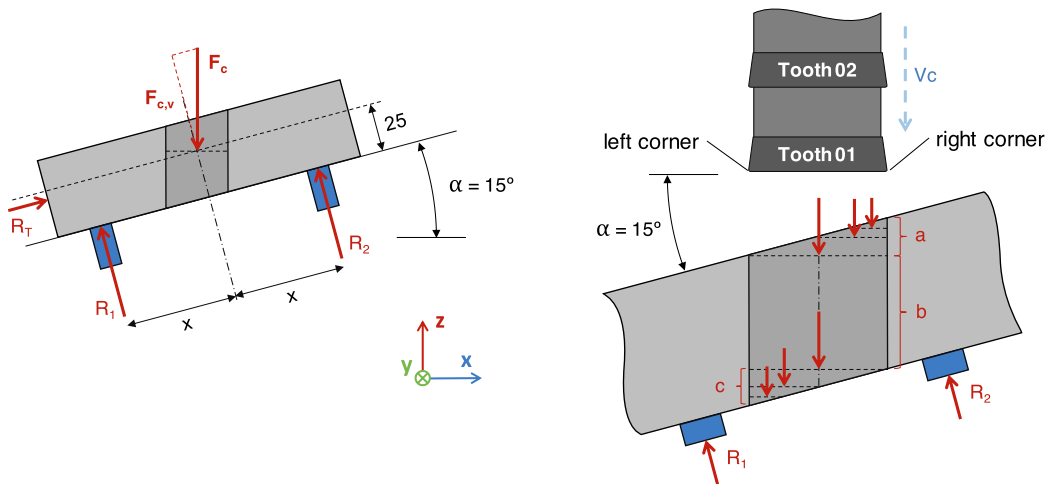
Scheme of the cutting force during the entry of the tool into the workpiece. Cutting edge right corner is the first engaging into disk.
